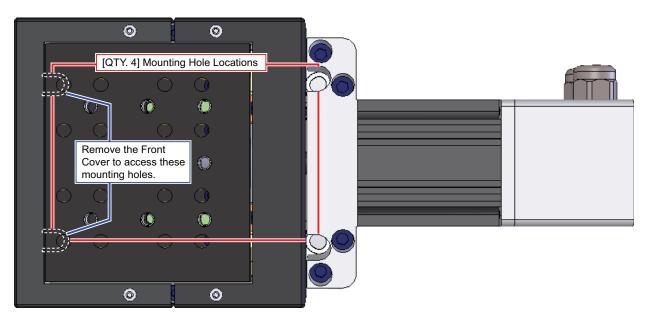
Surface Mounting Hole Location (AVSI106 Shown)
